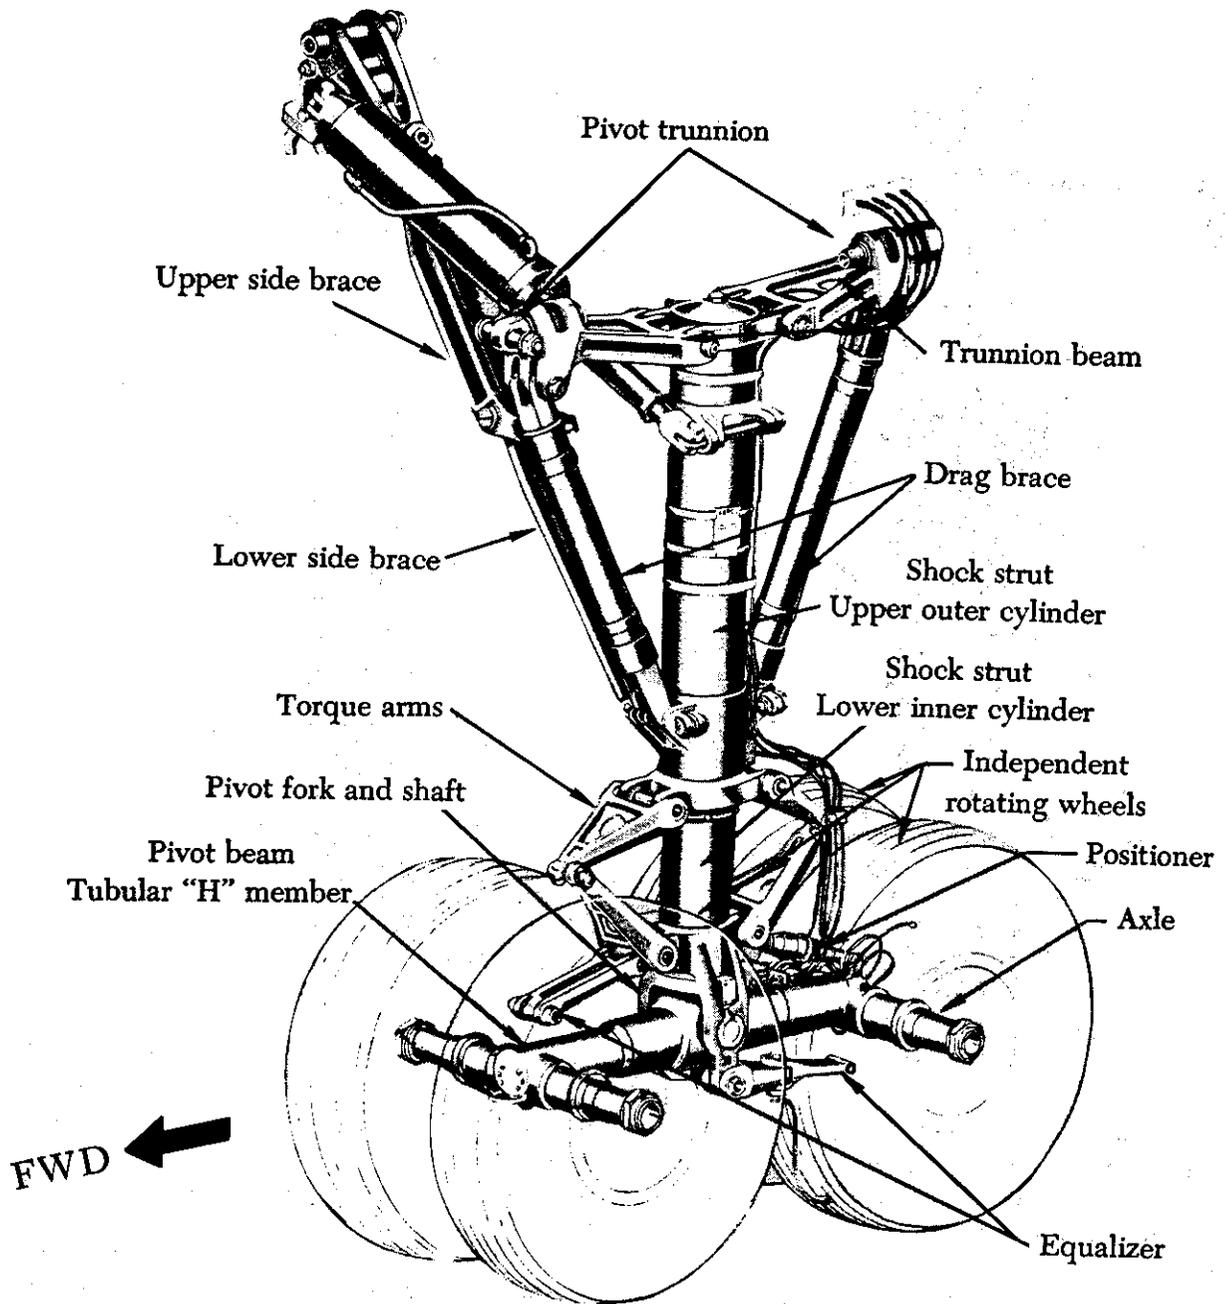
"Bogie" truck main landing gear assembly.
